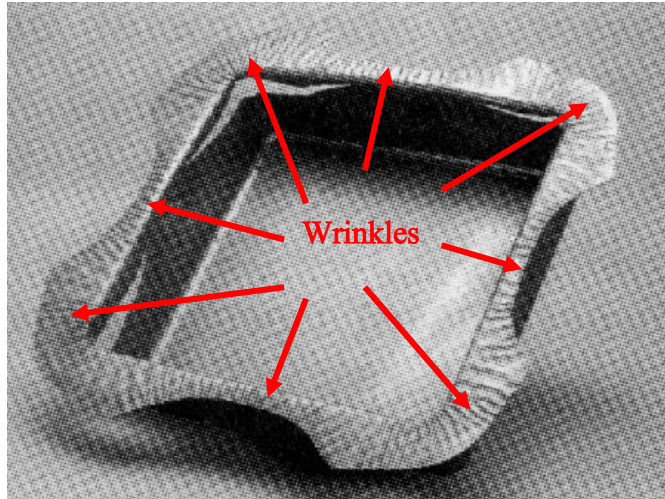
Wrinkling in the flange area of a cup formed from a steel sheet [86]
